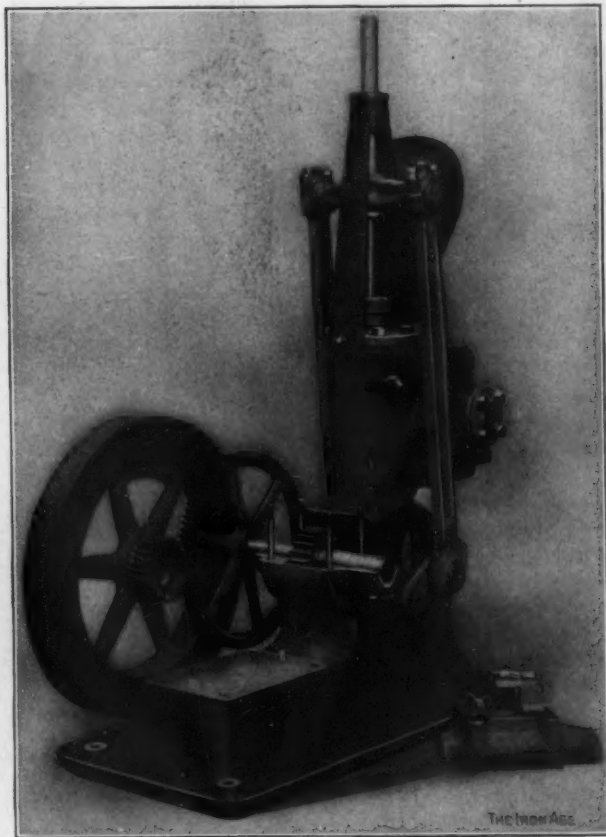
The Engine Removed from the Base to Show the Transmission.
